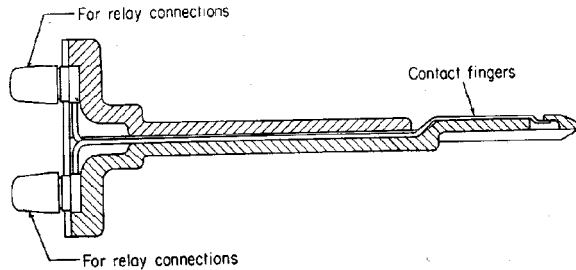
Sectional view of XLA13A test plug showing internal wiring
